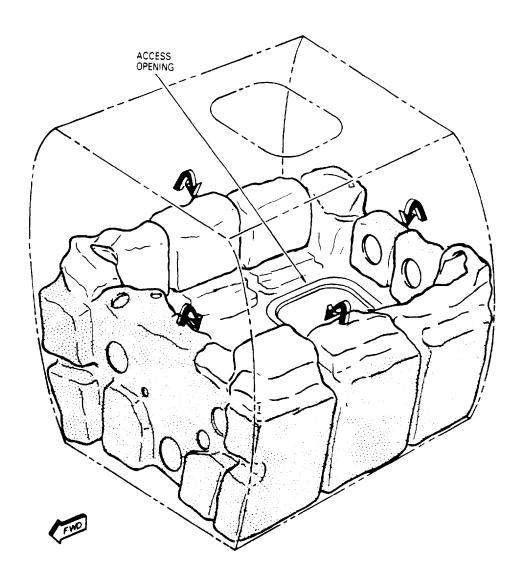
Removal - No. 2 Fuel Tank Folding (Sheet 2)
